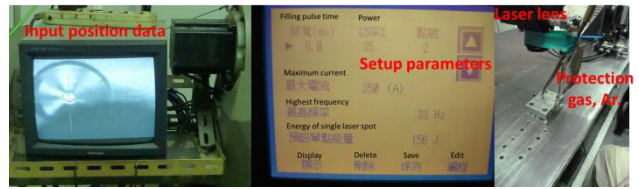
Nd-YAG pulsed laser for welding button electrodes.
